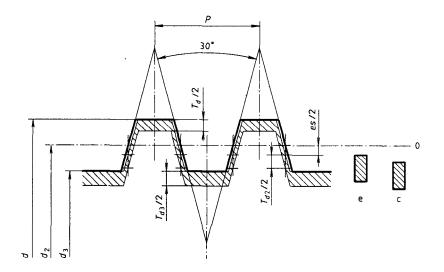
Bolt threads with tolerance positions c and e for the pitch diameter
